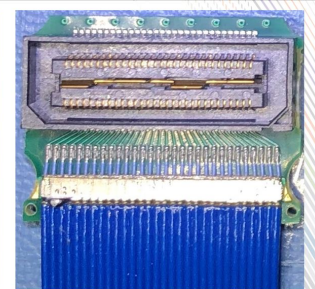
Assembly containing ribbonized cable built with blue colorant in dielectric layer (New revision)
